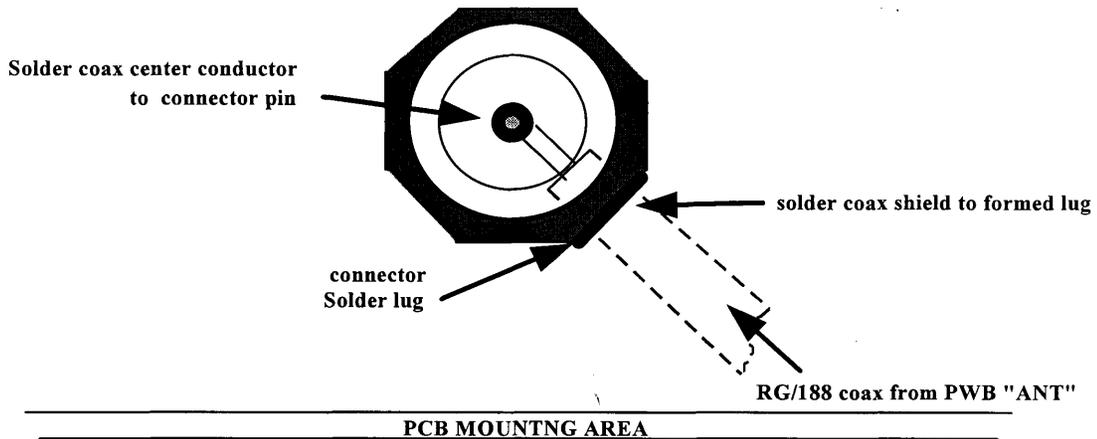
B Inside View of Enclosure, Solder Lug Installation on the 'N' or UHF Connector
